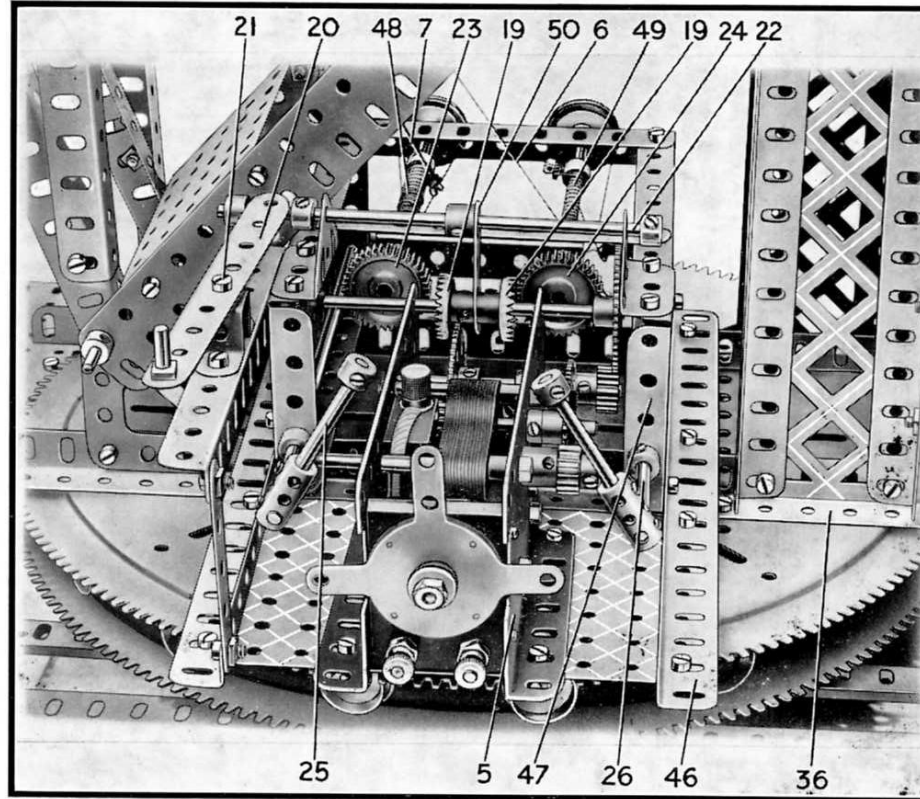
In this illustration the method of fitting the two hoisting shafts is plainly shown
